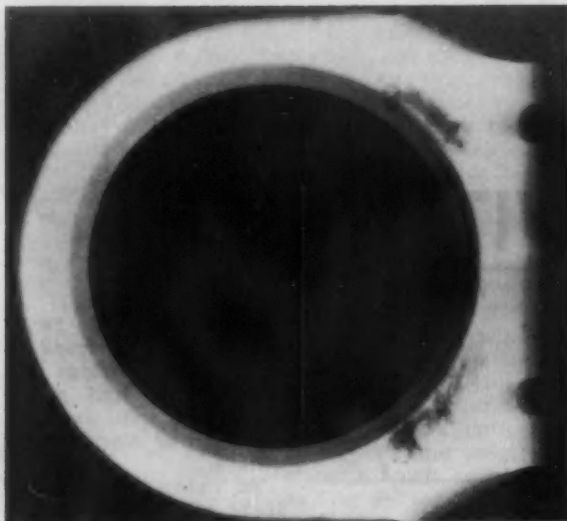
Shrinkage defects (dark areas at upper and lower right) in a steel casting as revealed by radiographic inspection.
